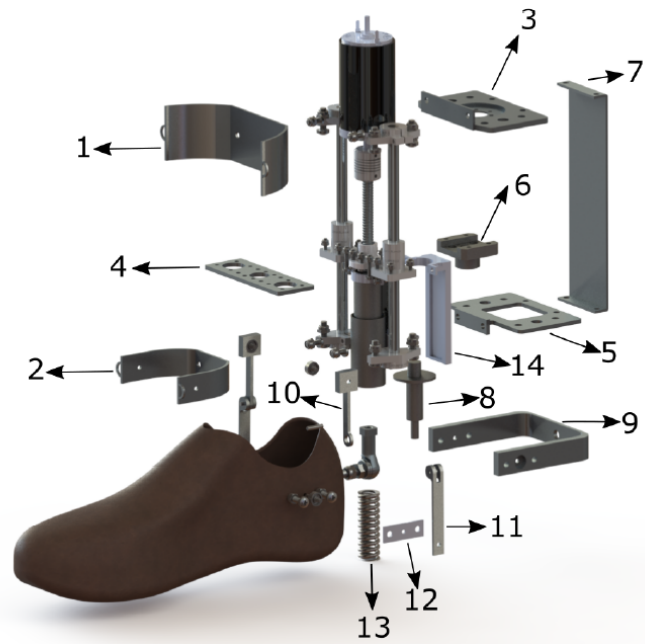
Exploded view of the ankle-foot orthosis model with the indicated part numbers.
